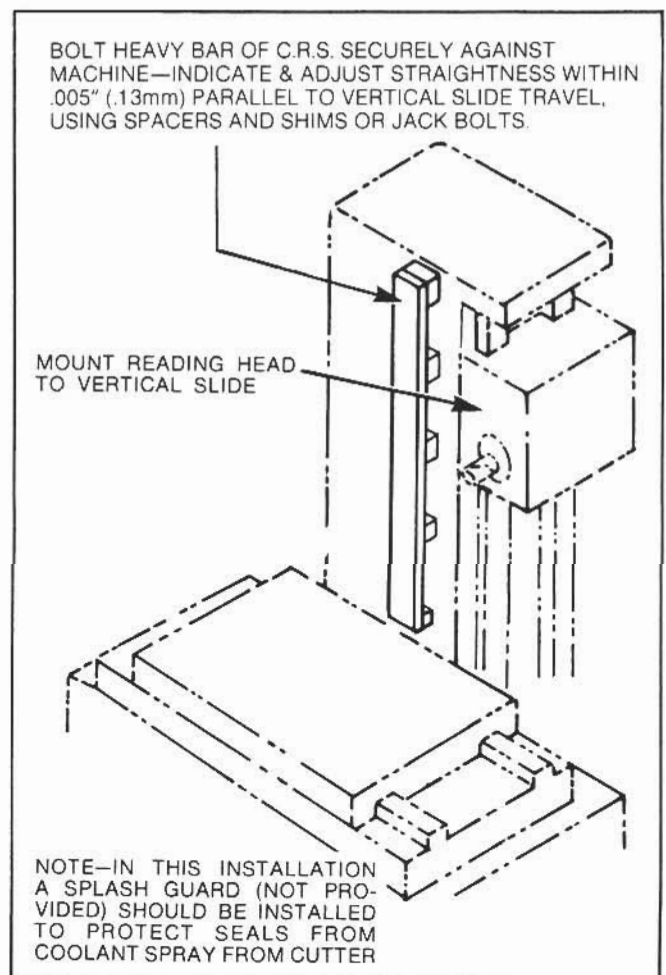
Alternate Method of Providing Back-Up Spar for Mounting Male Dovetail Spar on Z-Axis
